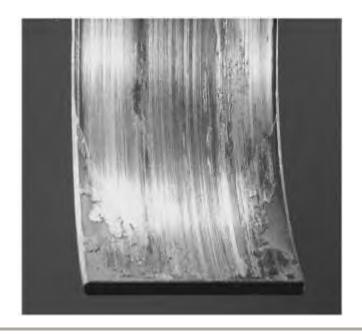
02142814Seized bearing, which is the final stage of lack of lubrication damage.
